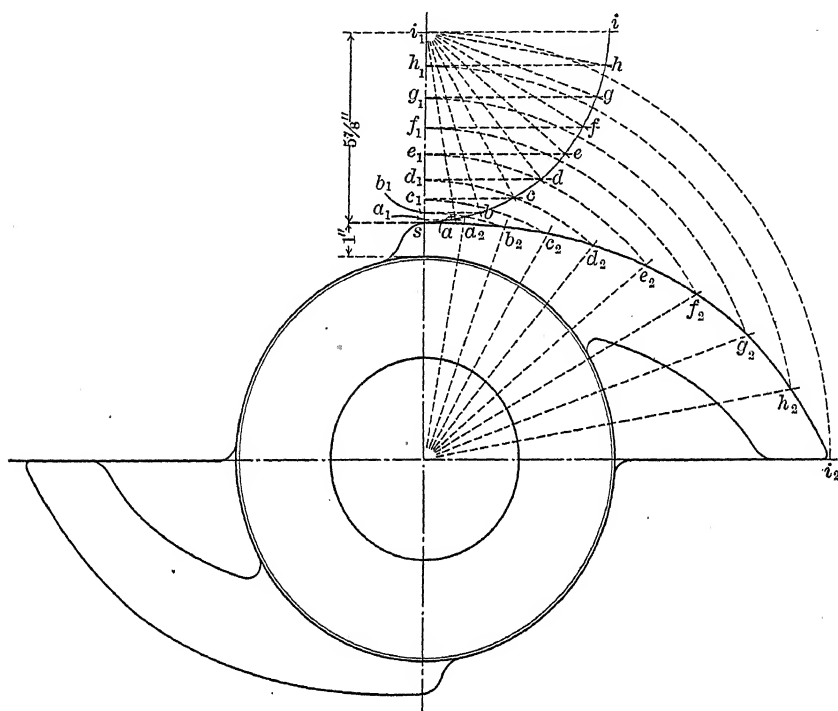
IMPROVED FORM OF CAM FOR STAMP MILLS.
